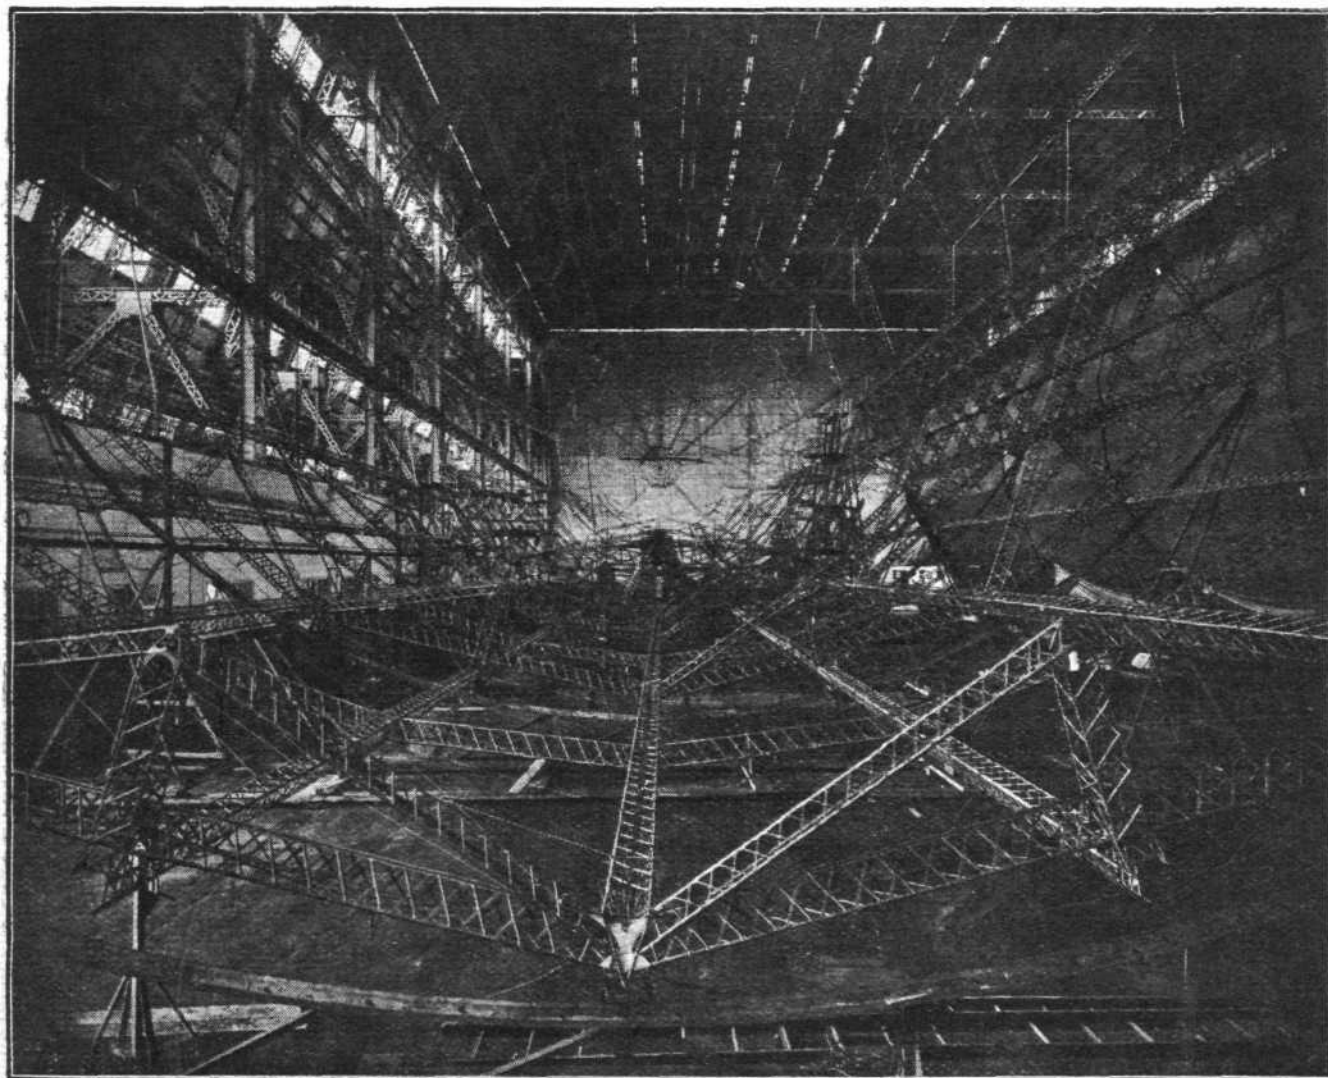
General structure of R 34, showing method of forming joints of main transverse girders and of longitudinal girders with transverse girders
